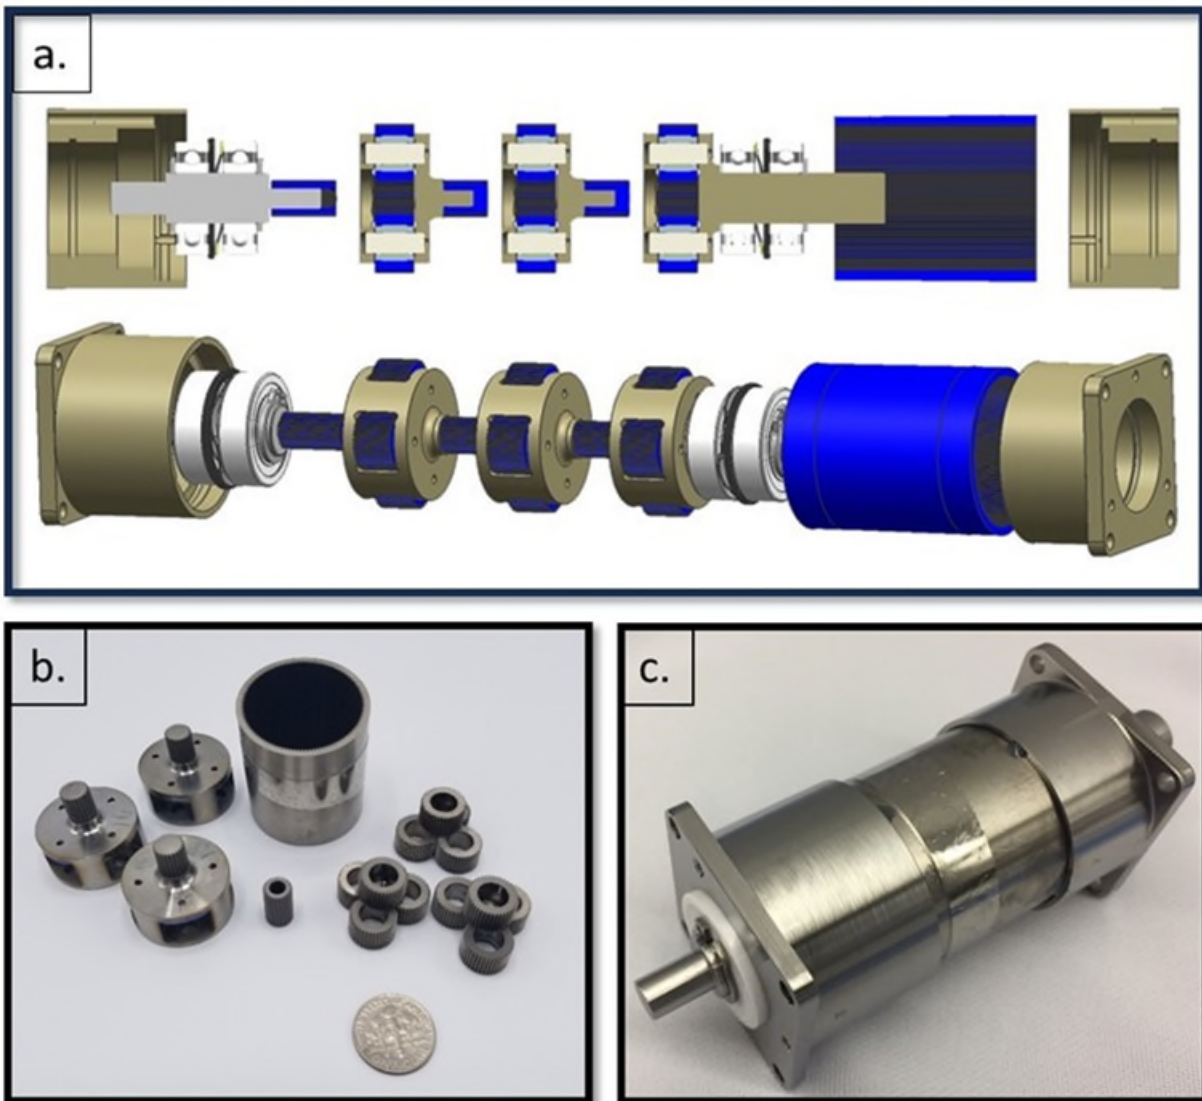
(a) Exploded views of the PoC gearbox design in cross-section and solid body. (b) Commercially fabricated BMG gear components (CW from left): overmolded planet gear carriers, ring gear, planet gears, pinion gear; (c) Assembled 3-stage, dry film lubricated BMG-based ~166:1 planetary gearbox.
